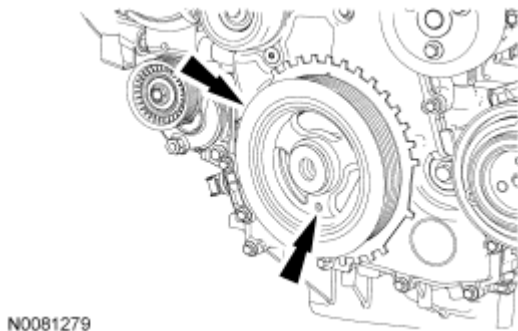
Identifying Hole In Crankshaft Pulley At 6 O'Clock Position
